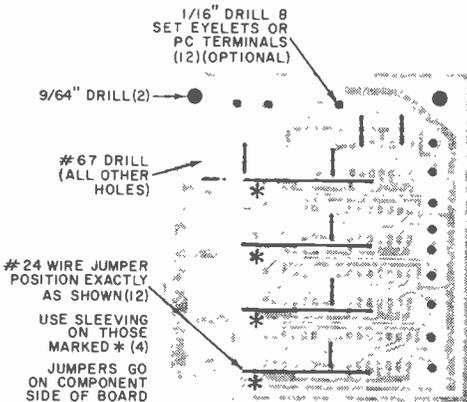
After drilling the PC board, install the 12 jumpers on the component side in positions shown.
